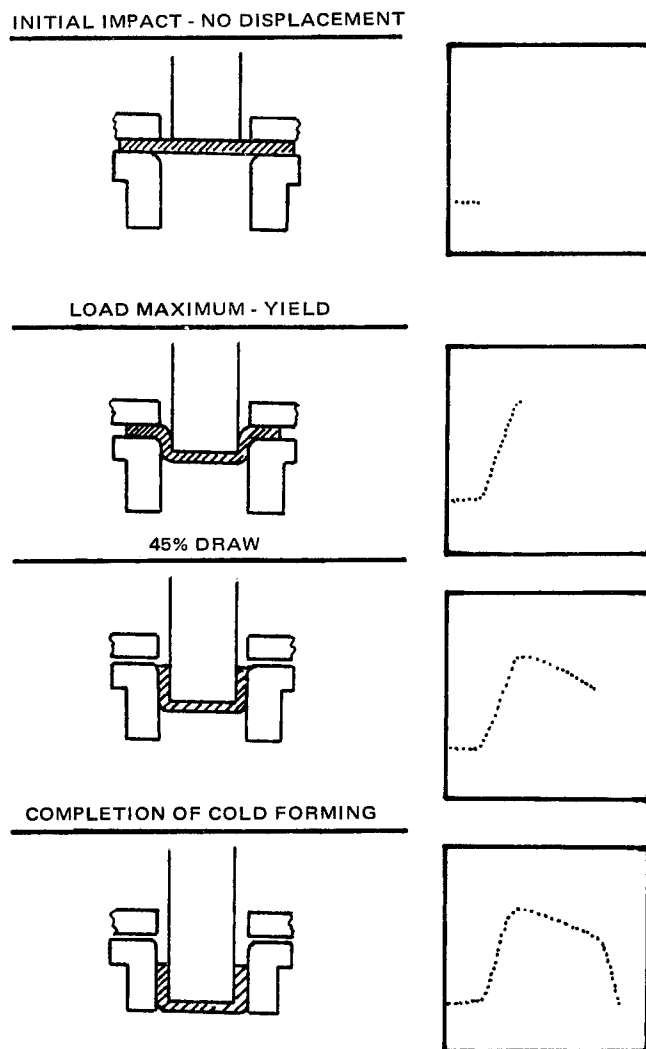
Progressive cold-forming of extruded ABS I below 100 in./min. (16)
